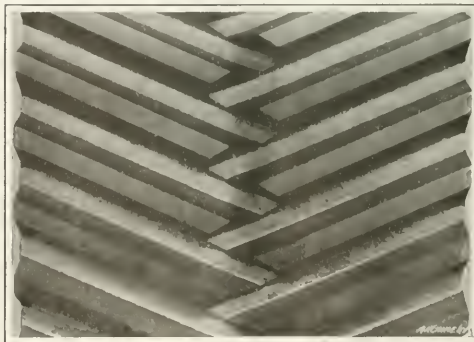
Close View of Section of a Wuest Herringbone Gear
